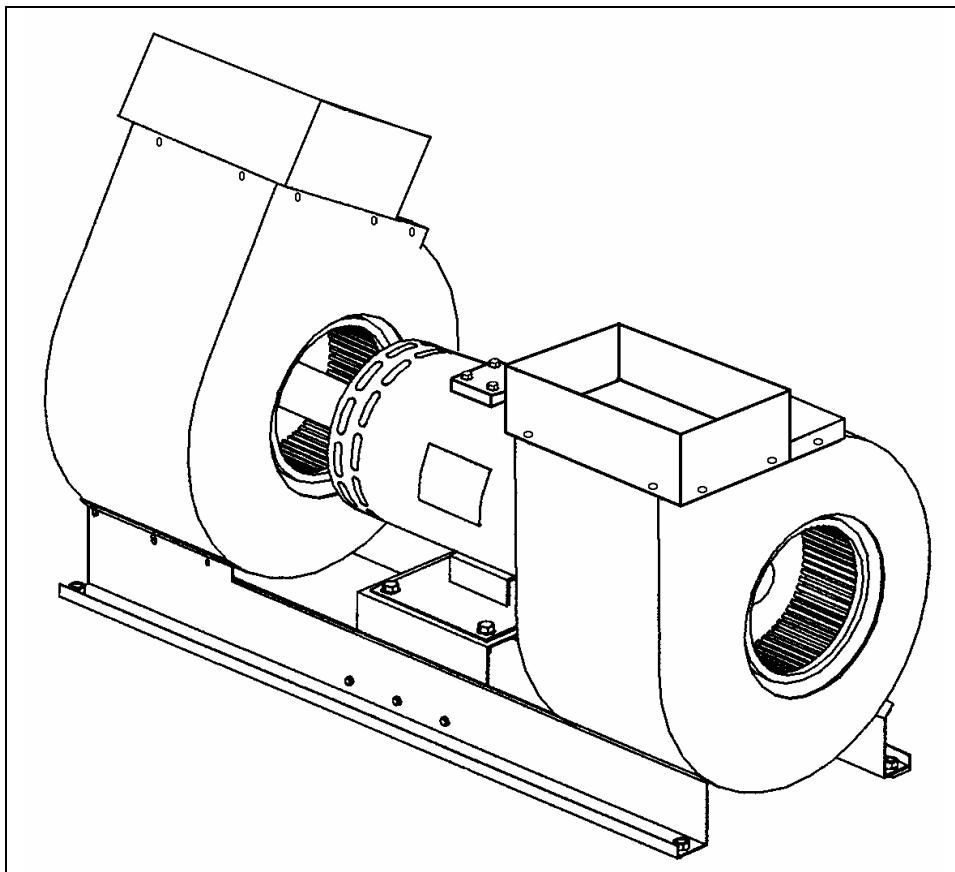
EVAPORATOR MOTOR ASSEMBLY
